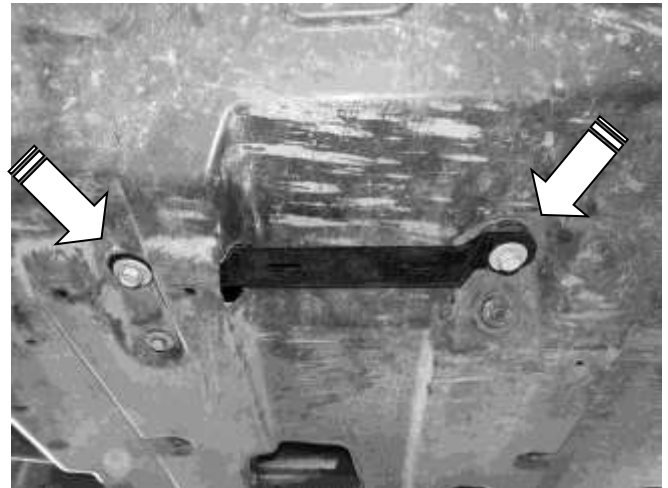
Reinstall splash guard. Note insert flat passenger/right side of Bracket through slot and between skid plate and crossmember
